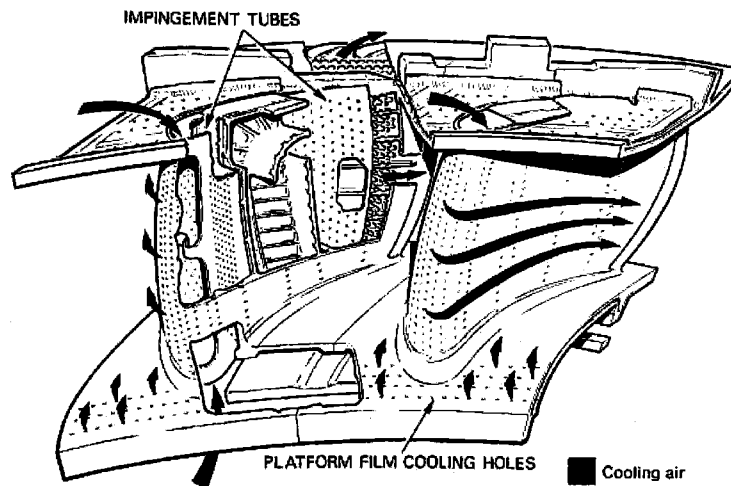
Film Cooling Holes Employed by the Turbine Blade
